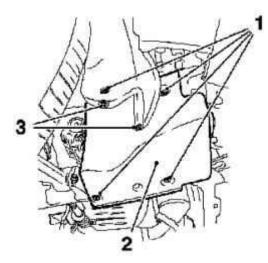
Components, Removable cover for dismantling the cylinder head: 1 - right engine splash guard, 2 - mounting screws, 3 - rivets
